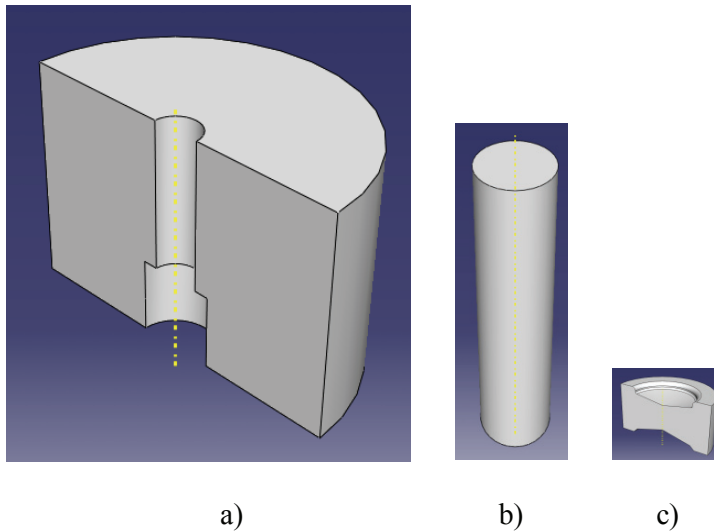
Simplified metal forming parts a: die, b: punch, c: workpiece.
